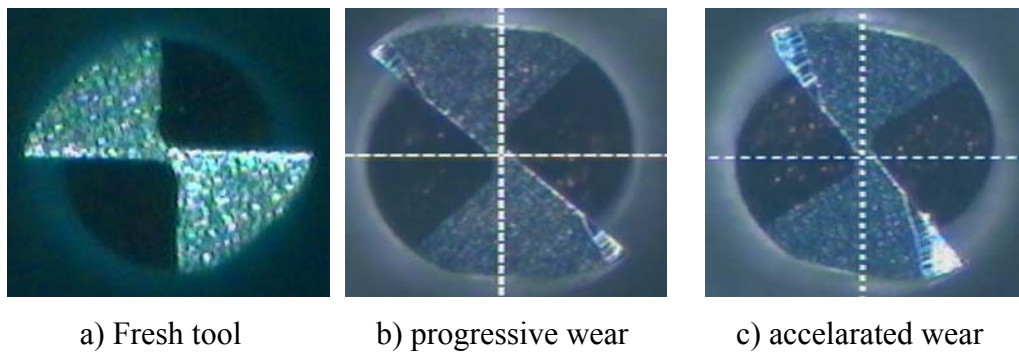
Flank face and flank wear of a micro end mill tool with diameter of 500 $\mu$ m
